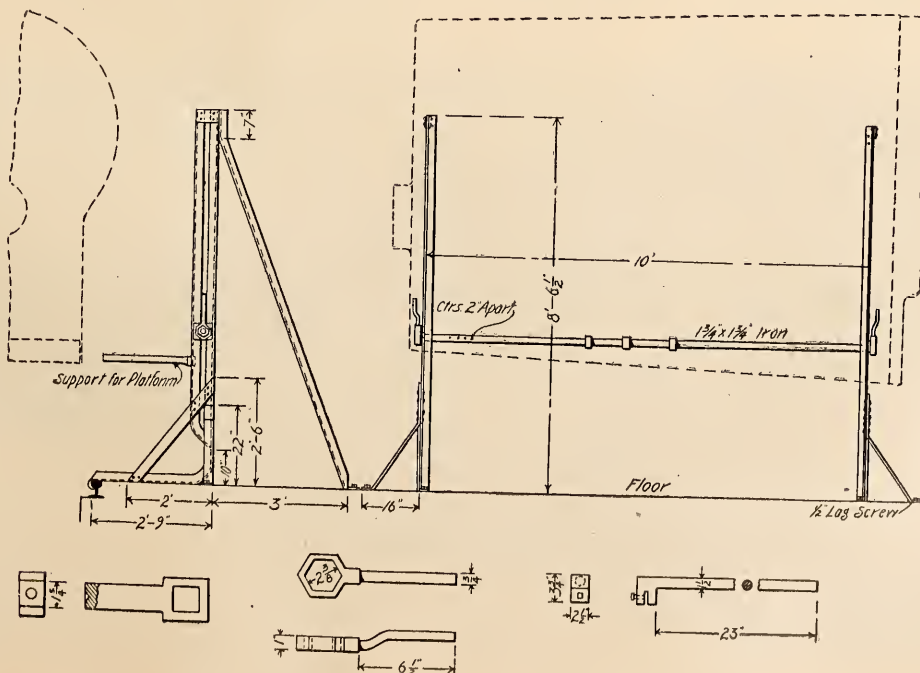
DRILLING RACK FOR STAYBOLT HOLES.
